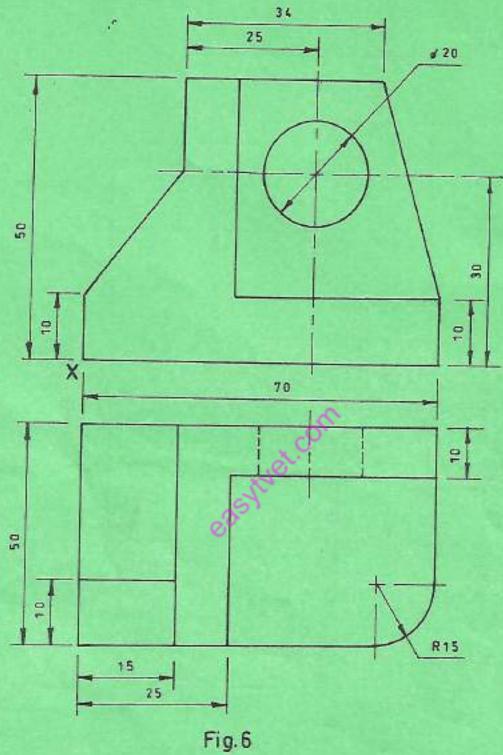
shows the views of a machine block. Draw an isometric drawing of the block with point X as the lowest point. (20 marks)
